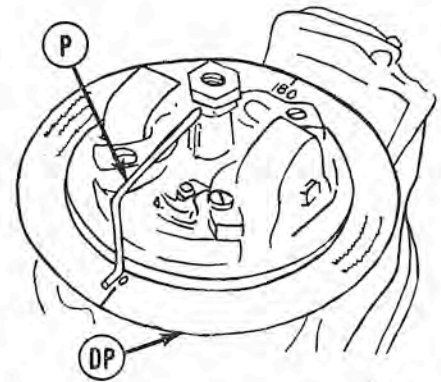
Synchronizing tool installed for adjusting the magneto points. Refer to text for details.
